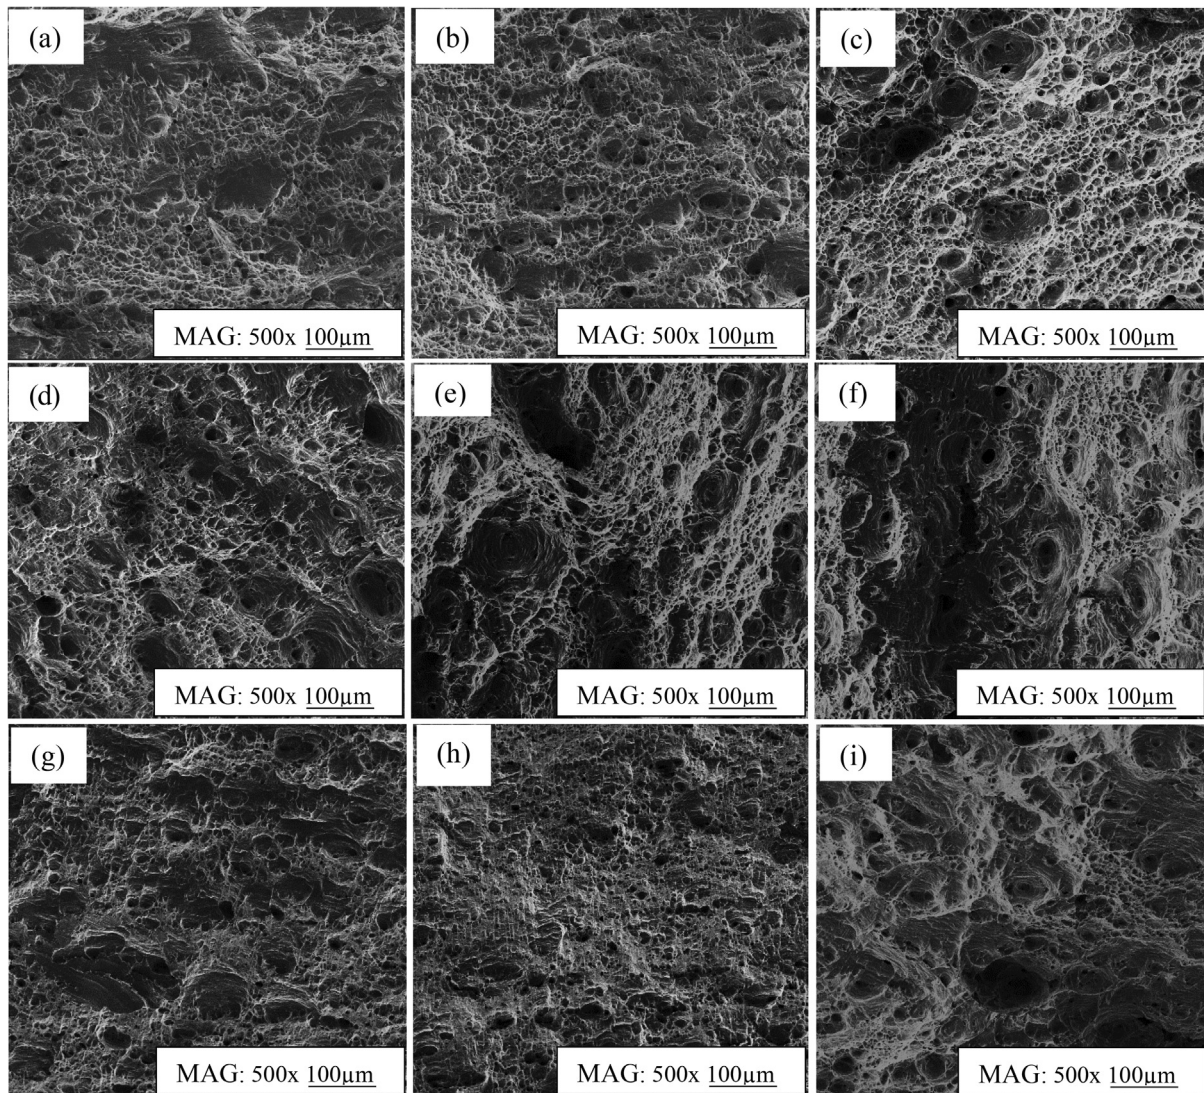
SEM fractographs; TIG welded joints, (a) Start, (b) Middle, (c) End; FSPed joints AA6082 advancing (d) Start, (e) Middle, (f) End; FSPed joints AA8011 advancing (g) Start, (h) Middle and (i) End.
